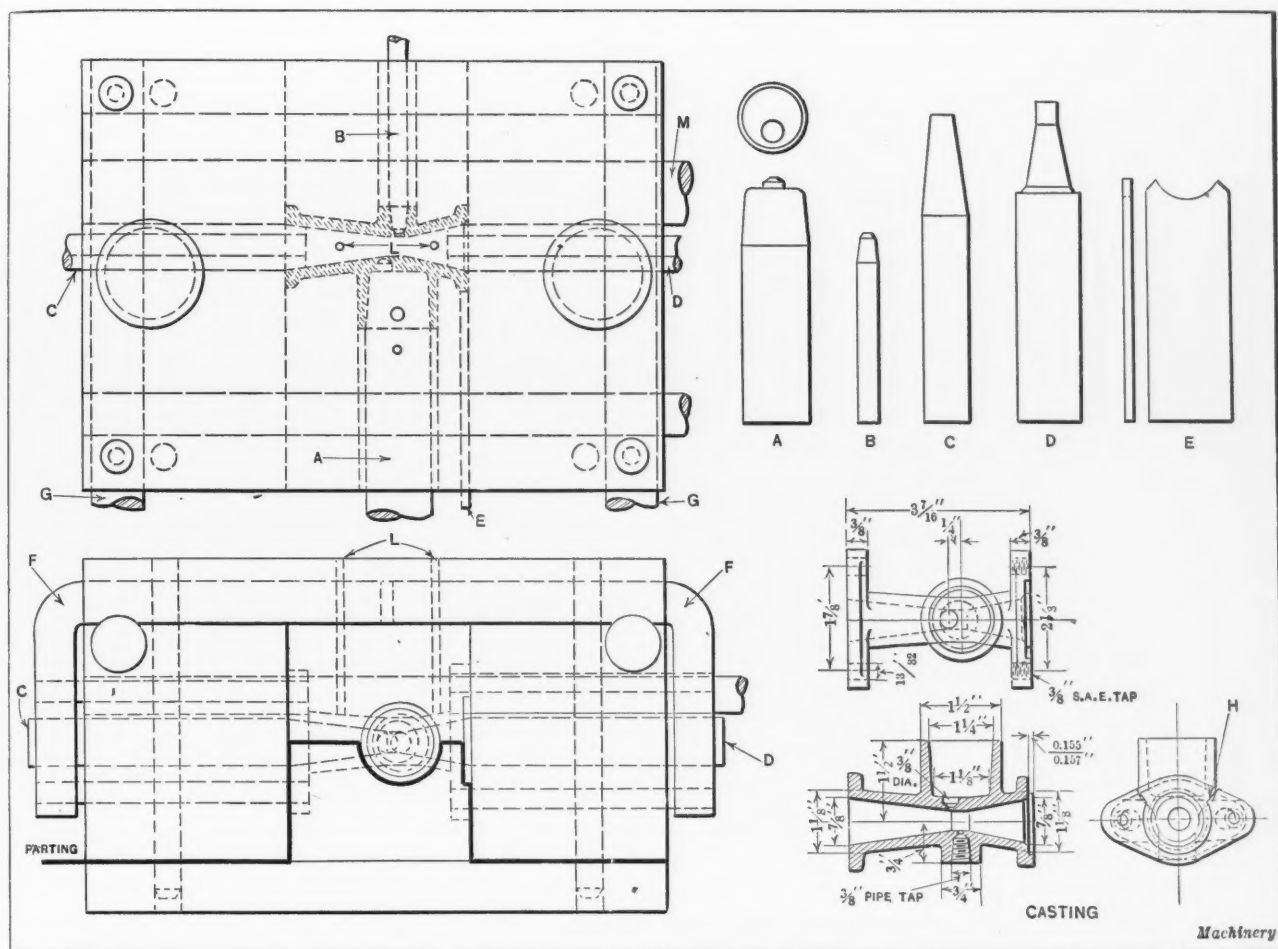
Detail Views of Cores, Die, and Casting illustrated in Fig. 1
